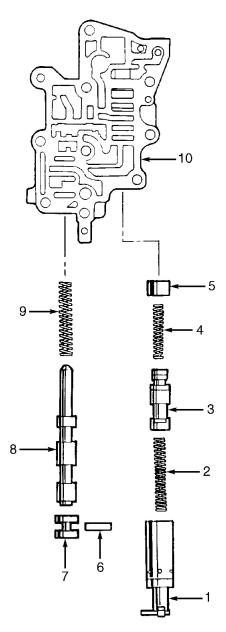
Exploded View Of Pre-Main Valve Body (GF4A-EL) Courtesy of MAZDA MOTORS CORP.
